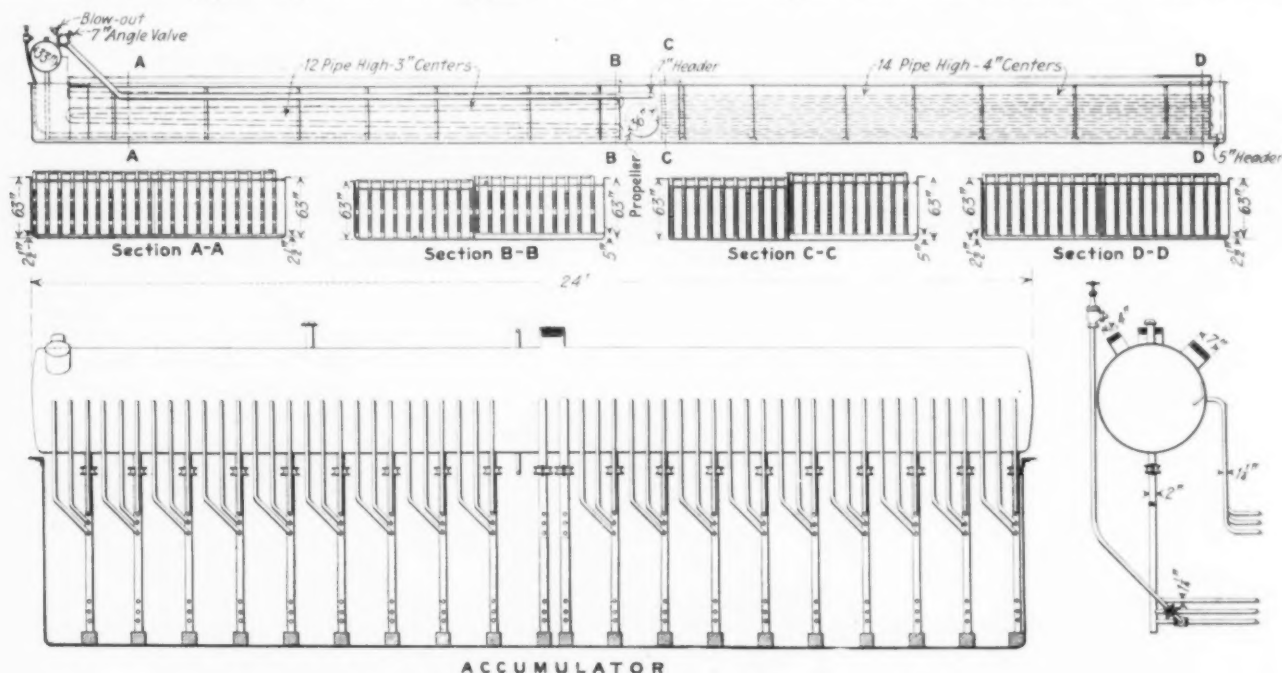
GENERAL LAYOUT OF ICE TANK AND CONNECTIONS TO HORIZONTAL ACCUMULATOR
